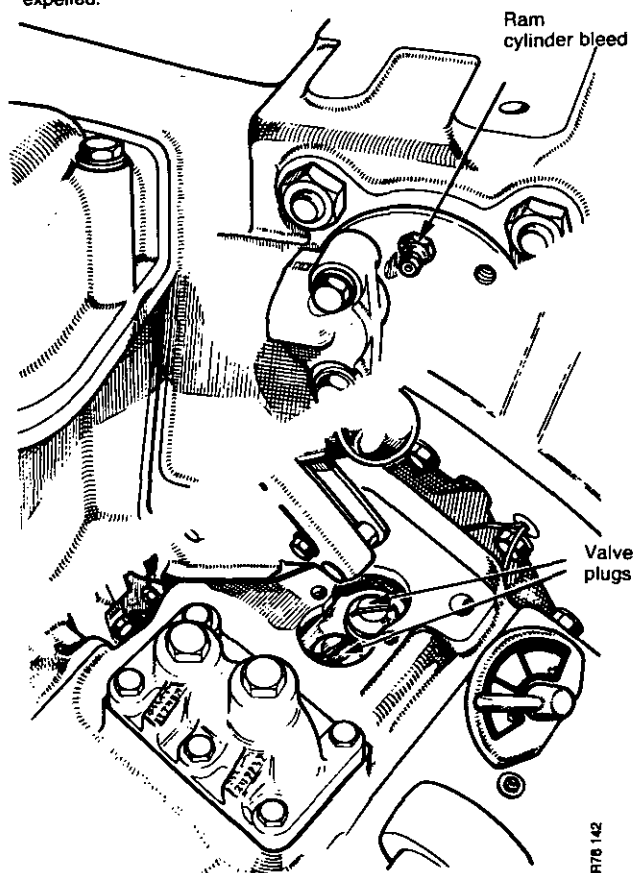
BLEEDING THE HYDRAULIC SYSTEM
